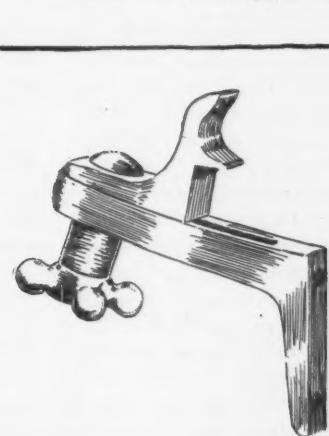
ADJUSTABLE BRACKET FOR WINDSHIELD VENTILATOR
